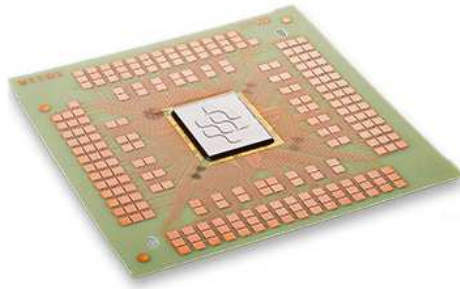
Chip mounted to the interposer in one of the steps of manufacturing using the i^2 Board technology [10].
